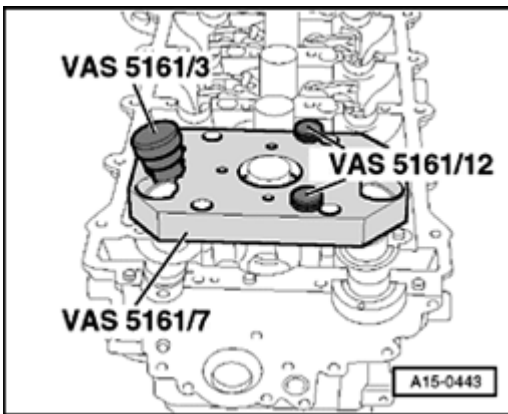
Placing Guide Plate VAS 5161/7 From Valve Cotter Disassembly, Assembly Device VAS 5161 On Cylinder Head & Securing Guide Plate VAS 5161/7 With Knurled Screws VAS 5161/12
